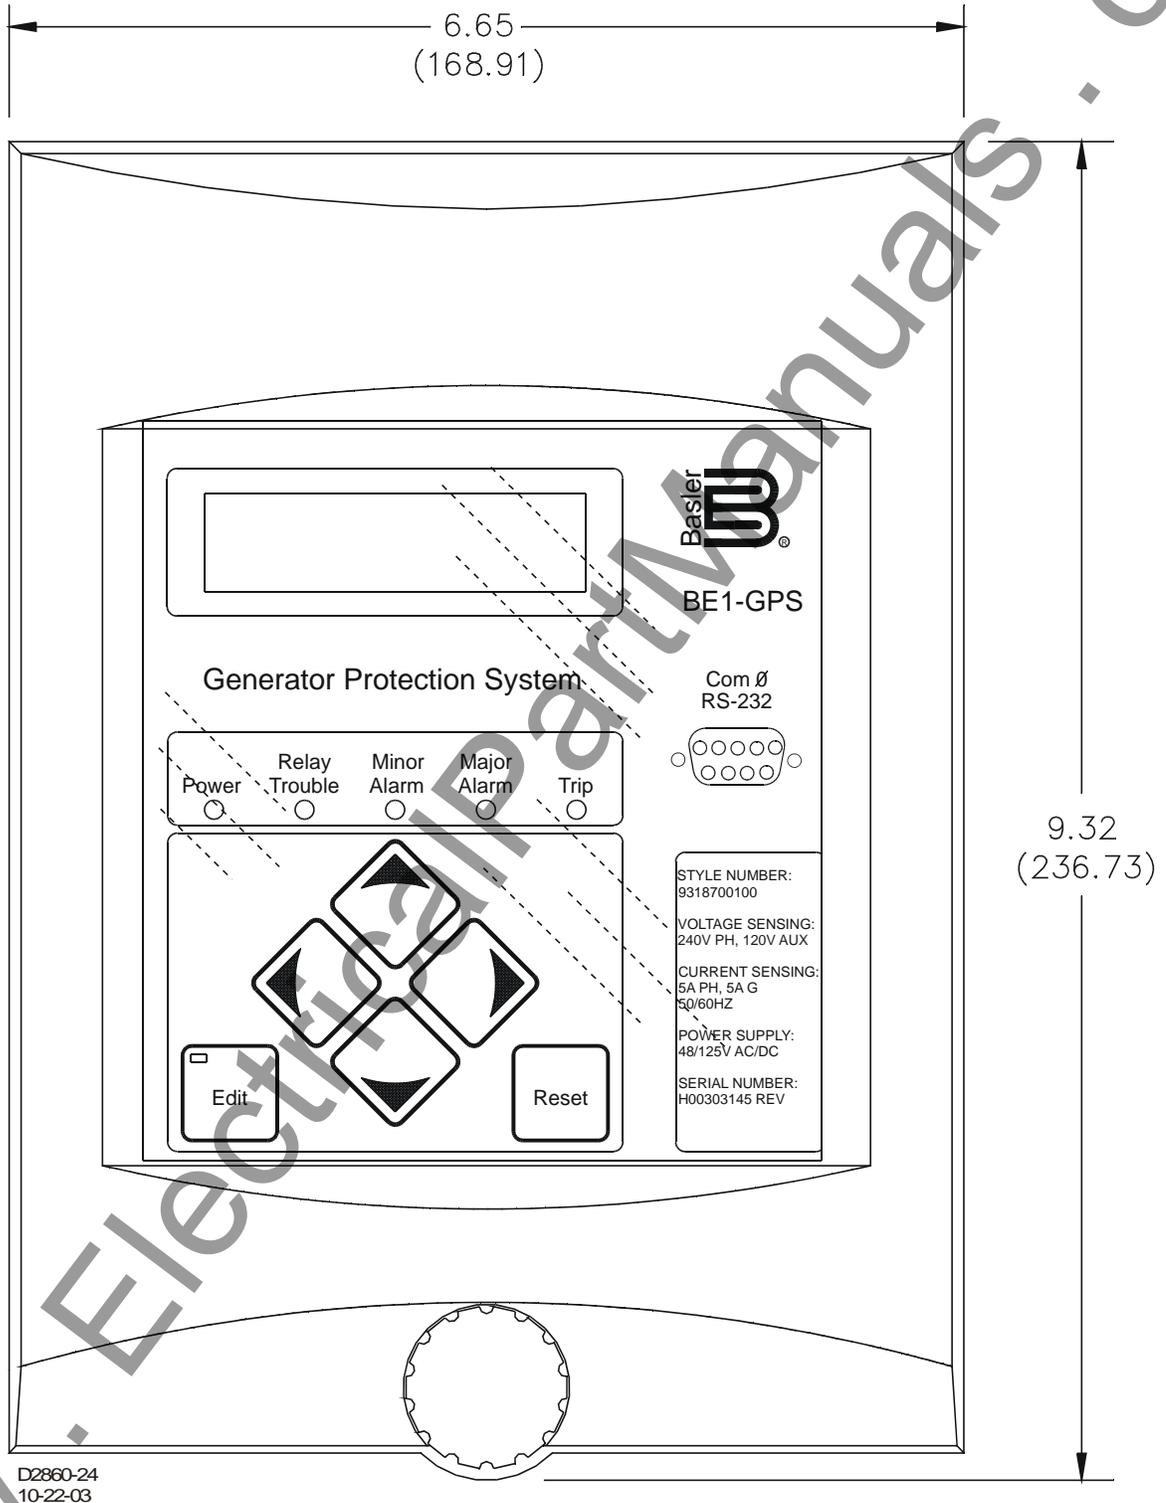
S1 and S1 Double-Ended Case, Outline Dimensions, Front View
